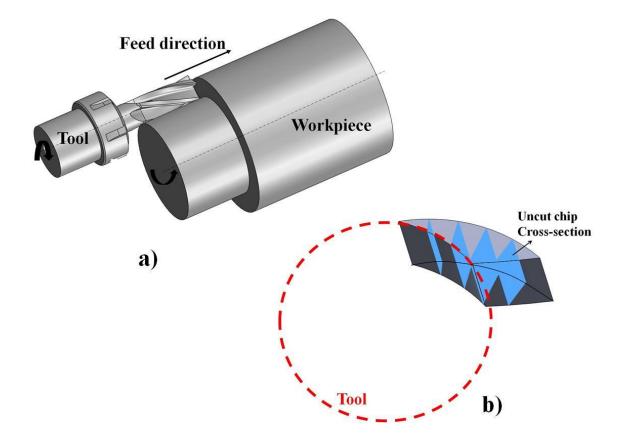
a) Co-axial turn-milling operation b) Uncut chip geometry in co-axial turnmilling [84].
